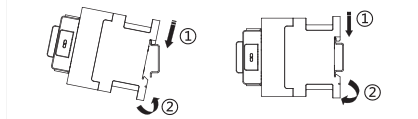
HDCX-09-38 DC Installation and disassembly methods
